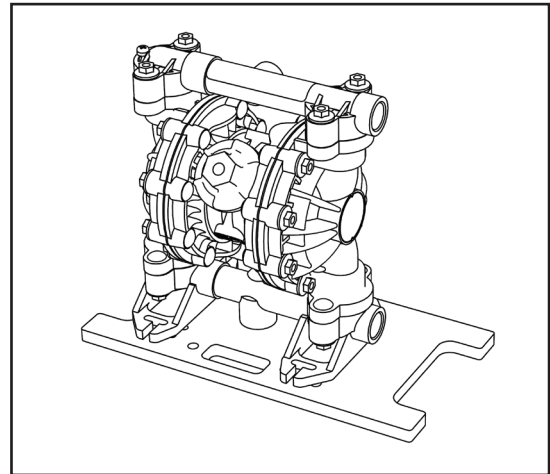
Pump Mounting Plate, shown with Graco Husky 515 pump on PBX-50 plate.
